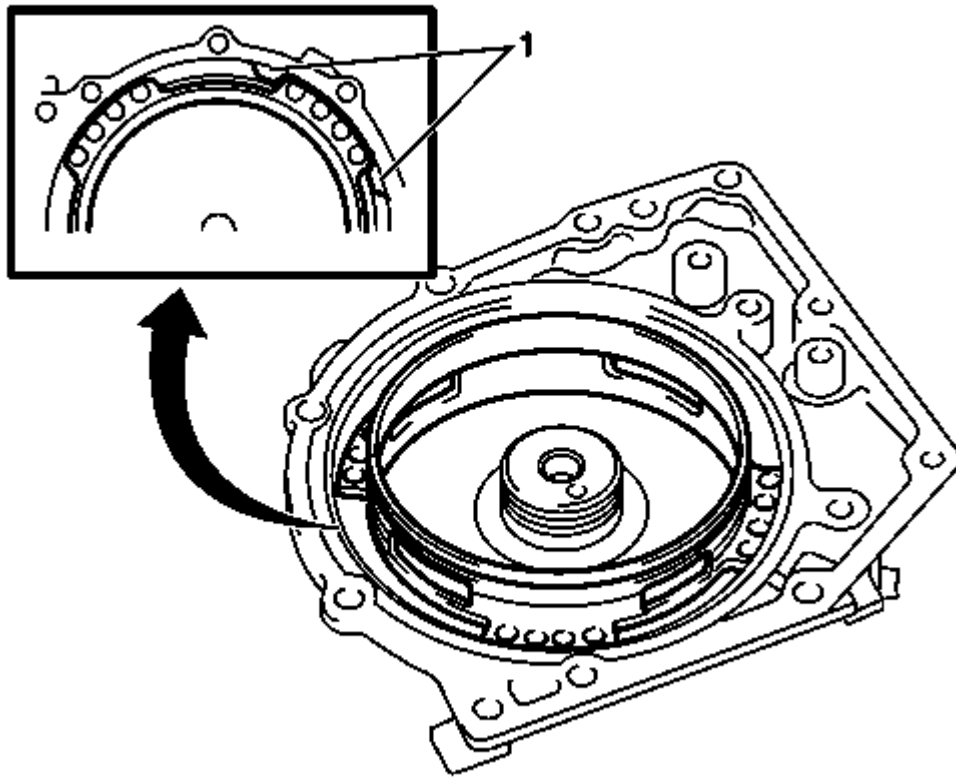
Coat O/D And 2Nd Coast Brake Piston With ATF
